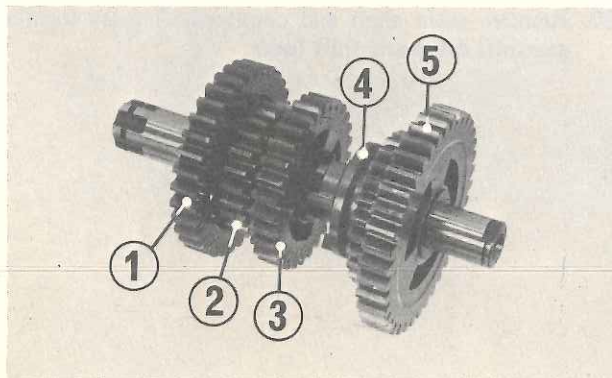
(1) Countershaft low gear (4) Countershaft fifth gear
